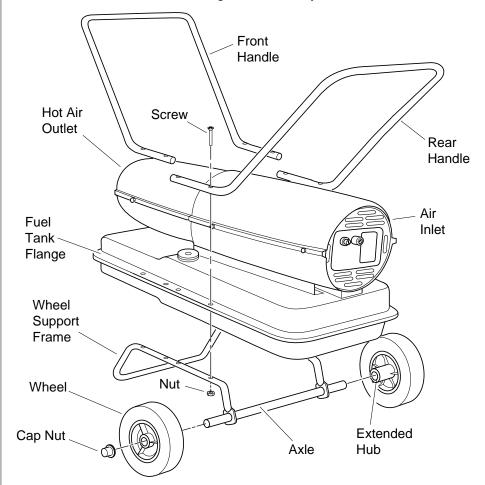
Wheel and Handle Assembly, 90/150,000 BTU/Hr Models Only
